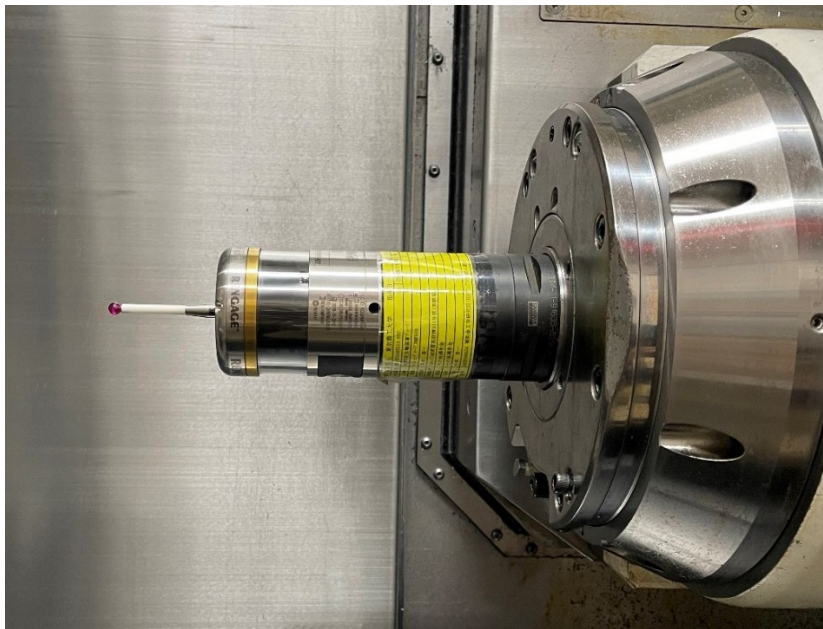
Attachment of the touch-trigger probe on the spindle
